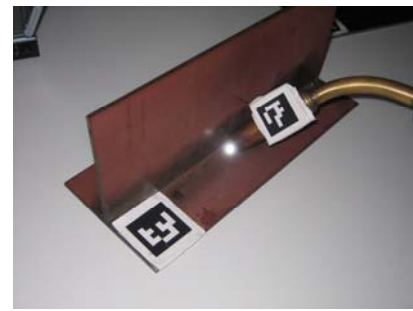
Welding Torch and Work Piece with Optical Marker
